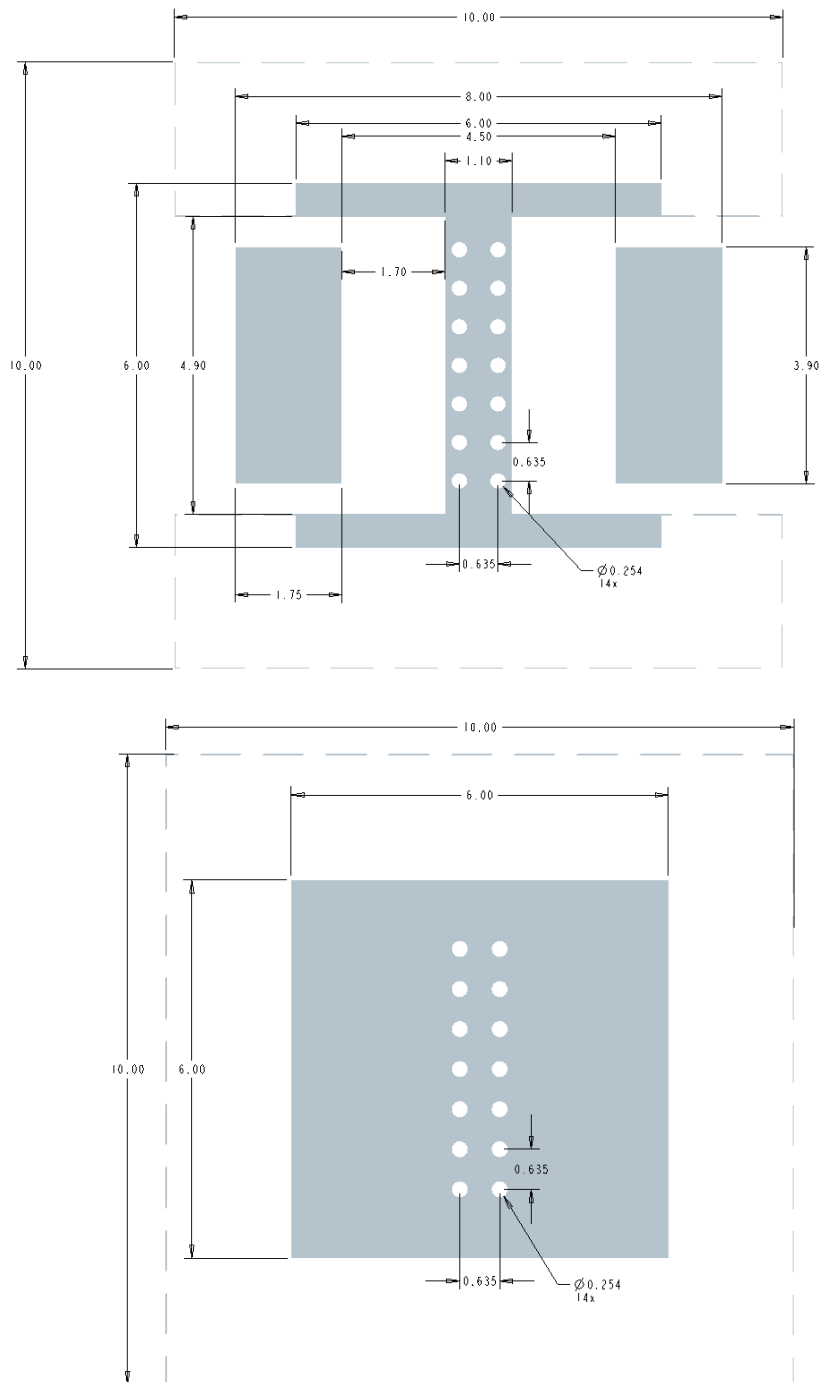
Recommended footprint for XLamp MX package on FR-4 PCB (top and bottom)
